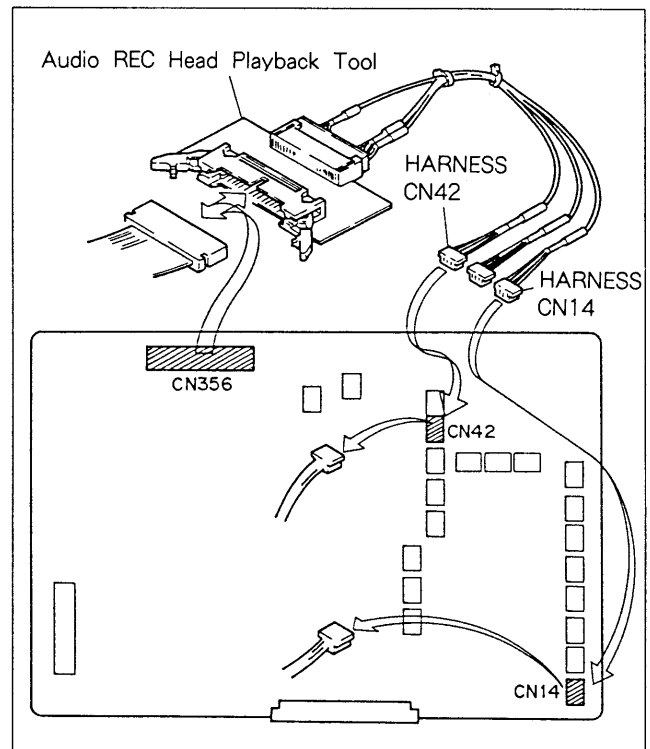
Connection of Audio REC Head Playback Tool
